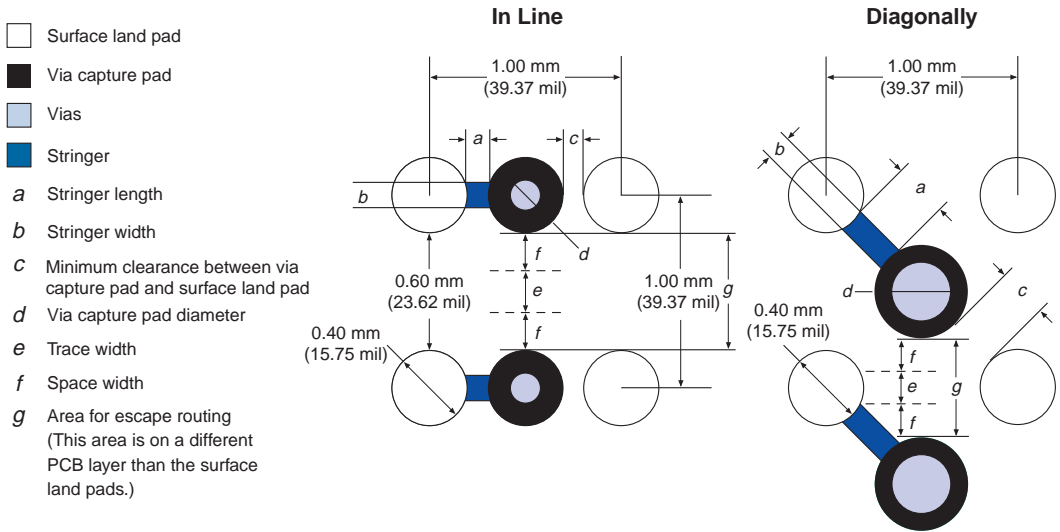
(#) shows how much space is available for vias and escape routing when you use 15.75-mil surface land pads.
